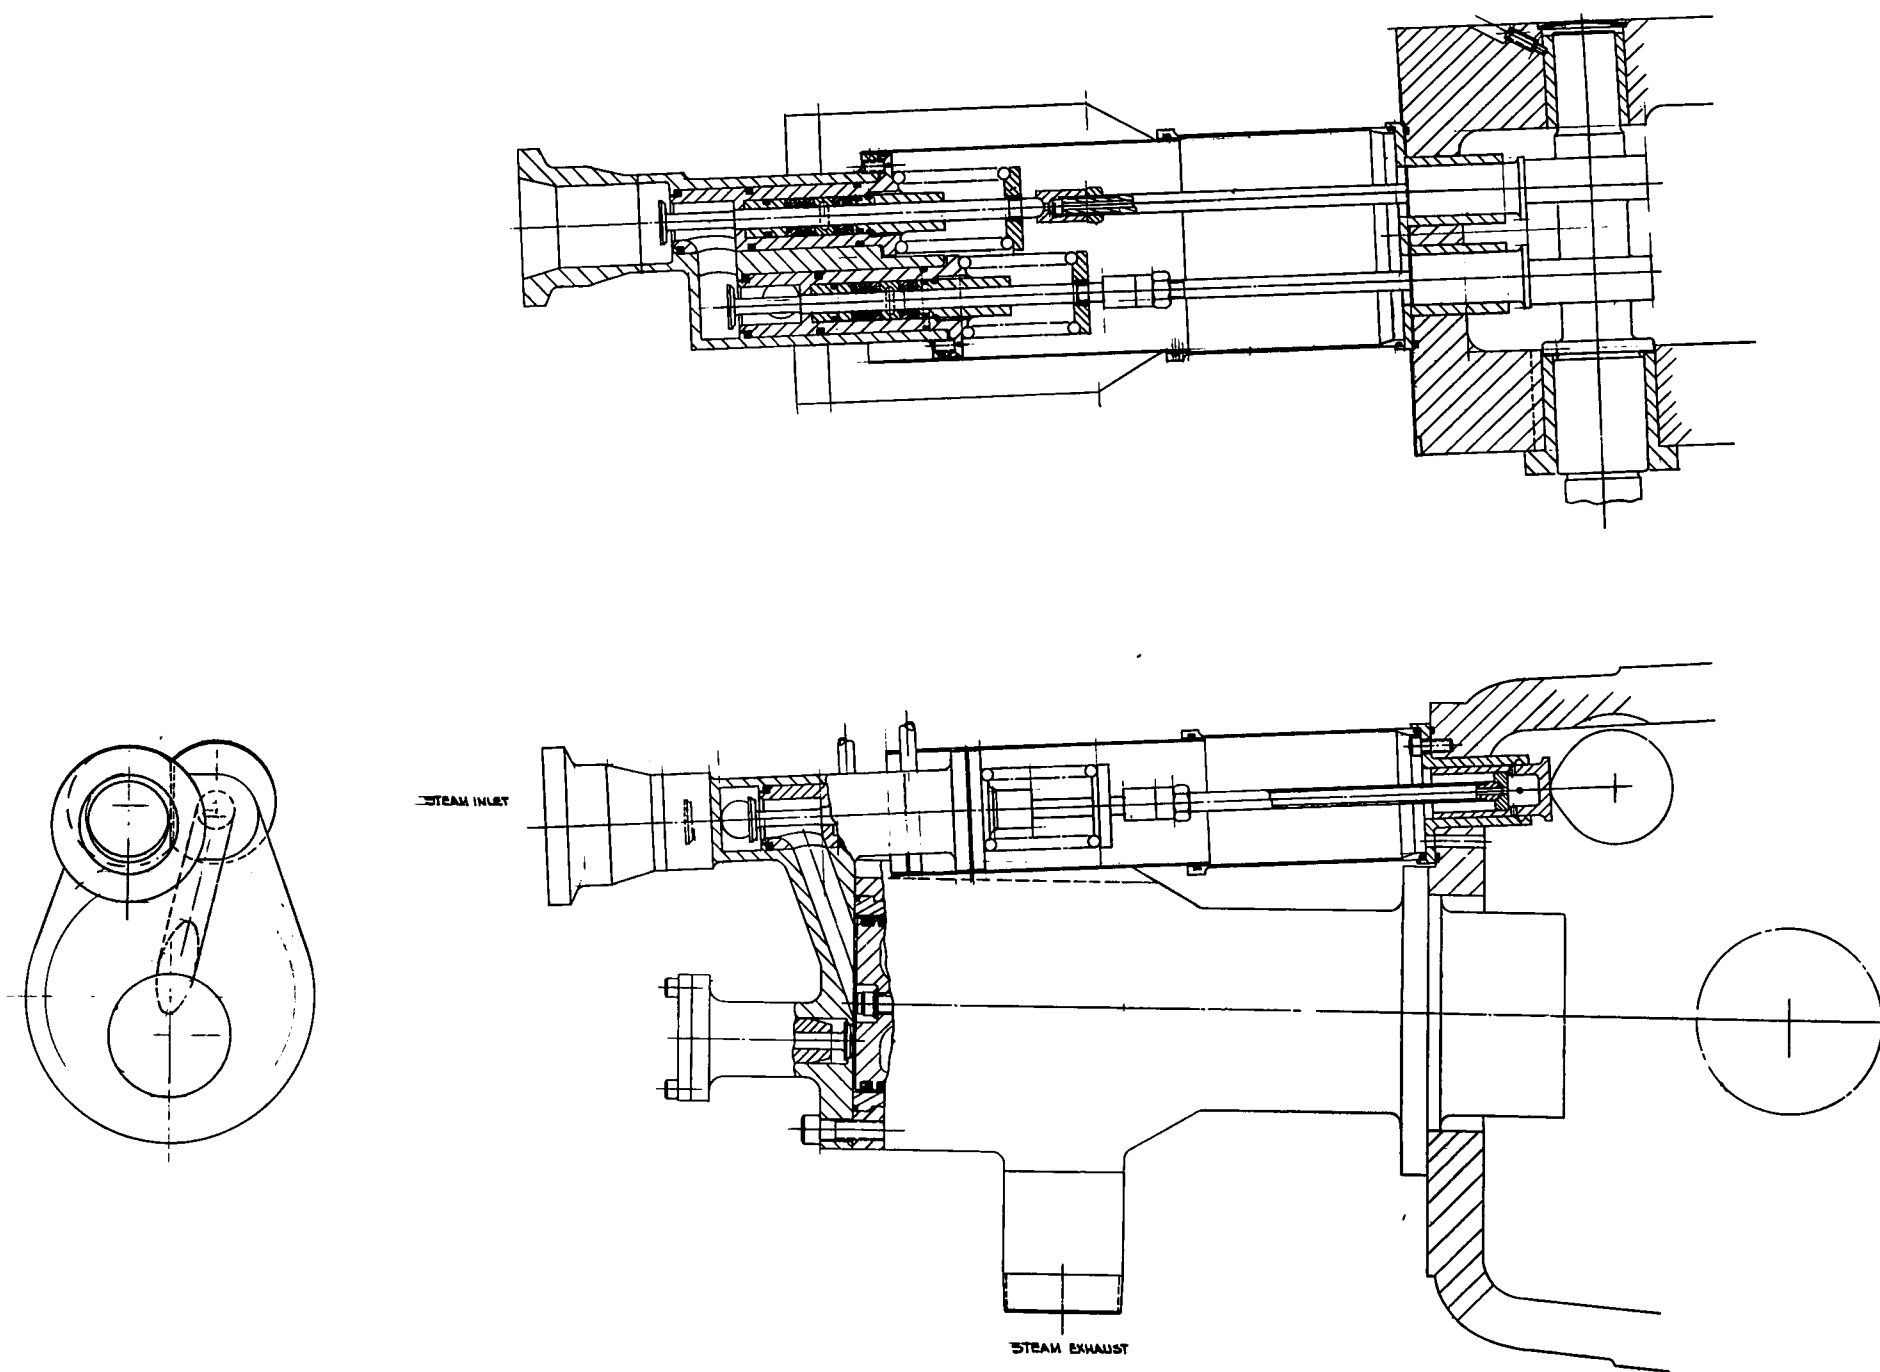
Valve Sleeve Packing - Cutoff Valve Steam Expander - Crosshead Type Piston (GE Dwg. 707E710).
